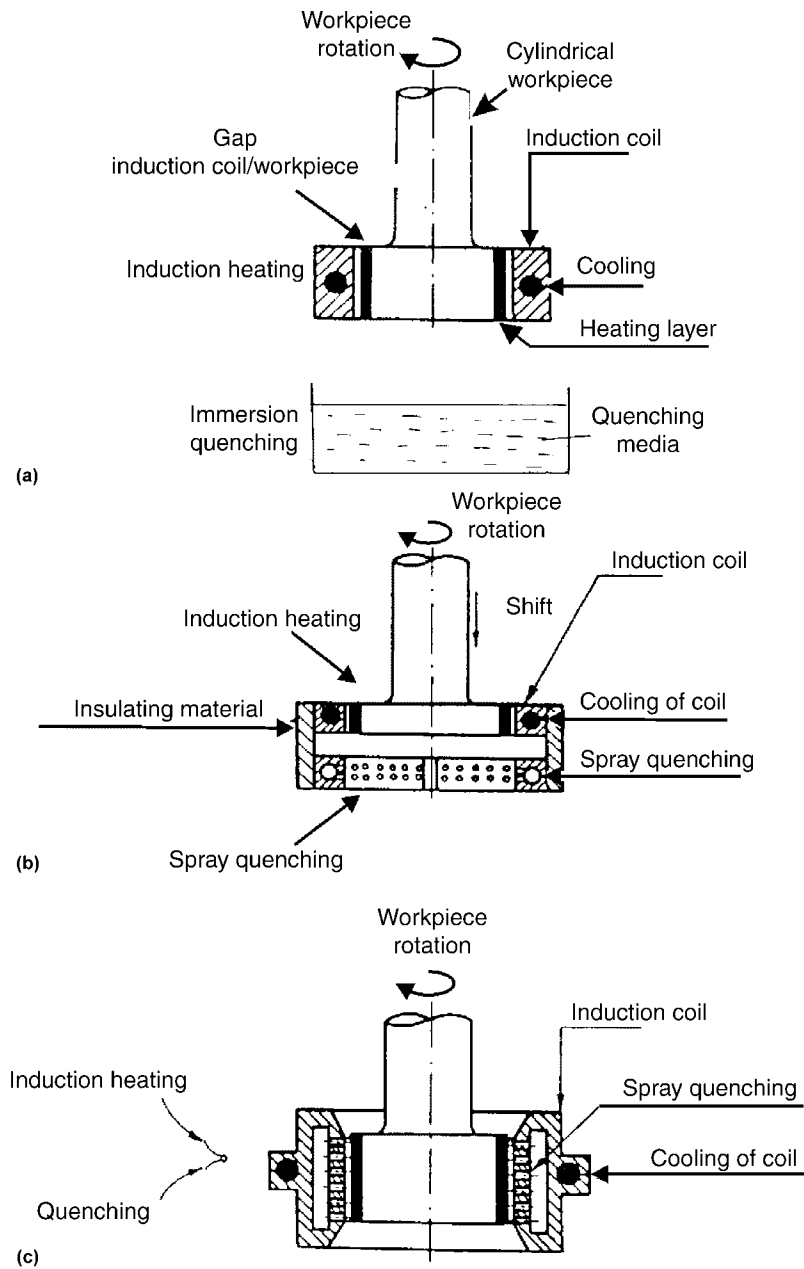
Single-shot induction hardening of cylindrical workpieces. (a) Separately installed induction coil and immersion quenching. (b) Induction coil and spray quenching adapted for quenching. (c) Separately installed induction coil and spray quenching. Source: Ref 1, 2
